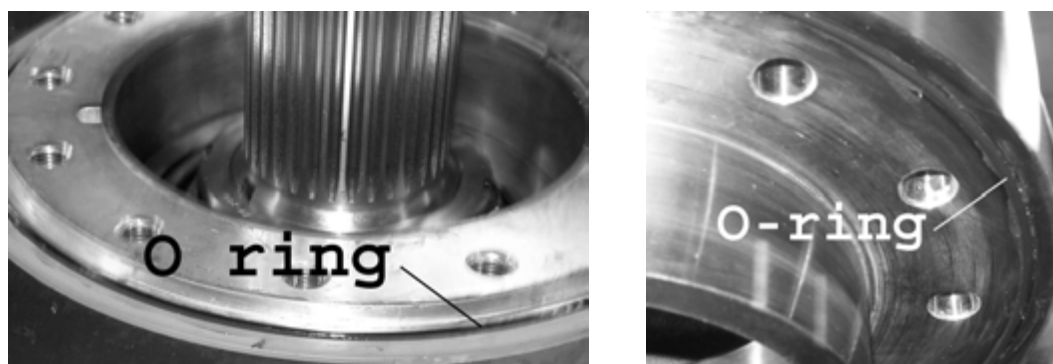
O-ring On Thrust Tube (left), and Use Grease to Hold O-ring in Thrust Ball Groove (right)
